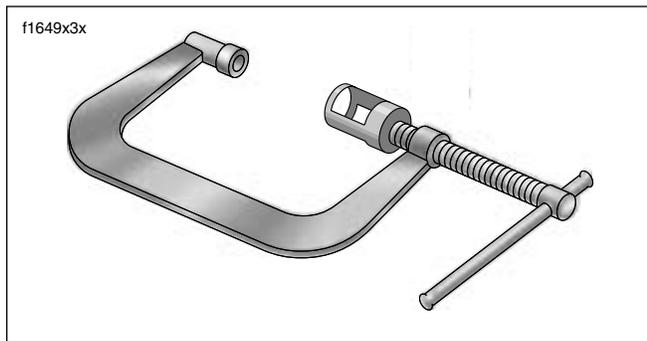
Valve Spring Compressor (Part No. HD-34736B)
